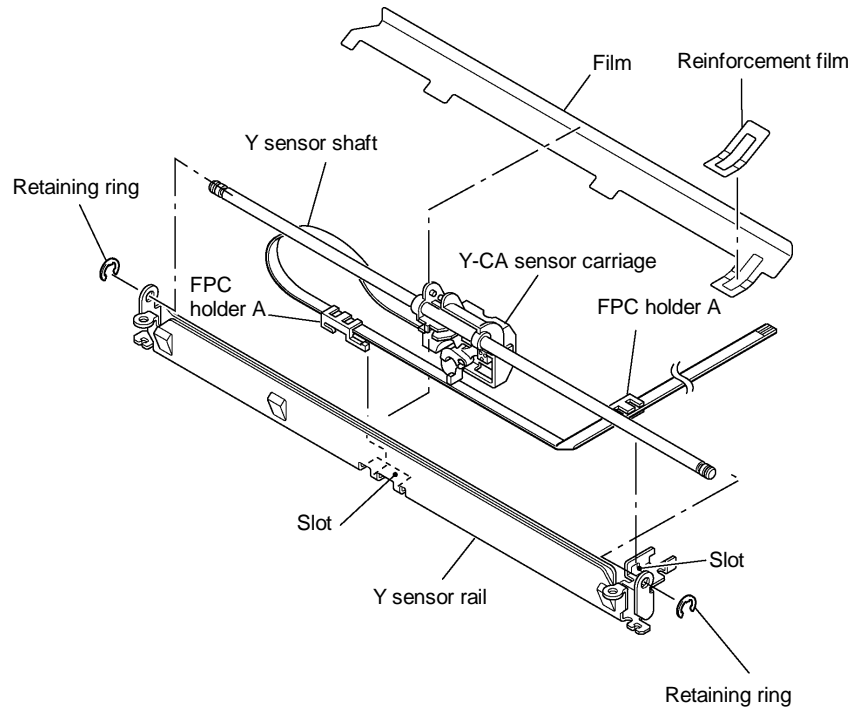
Assembling the Y-sensor Rail Unit
